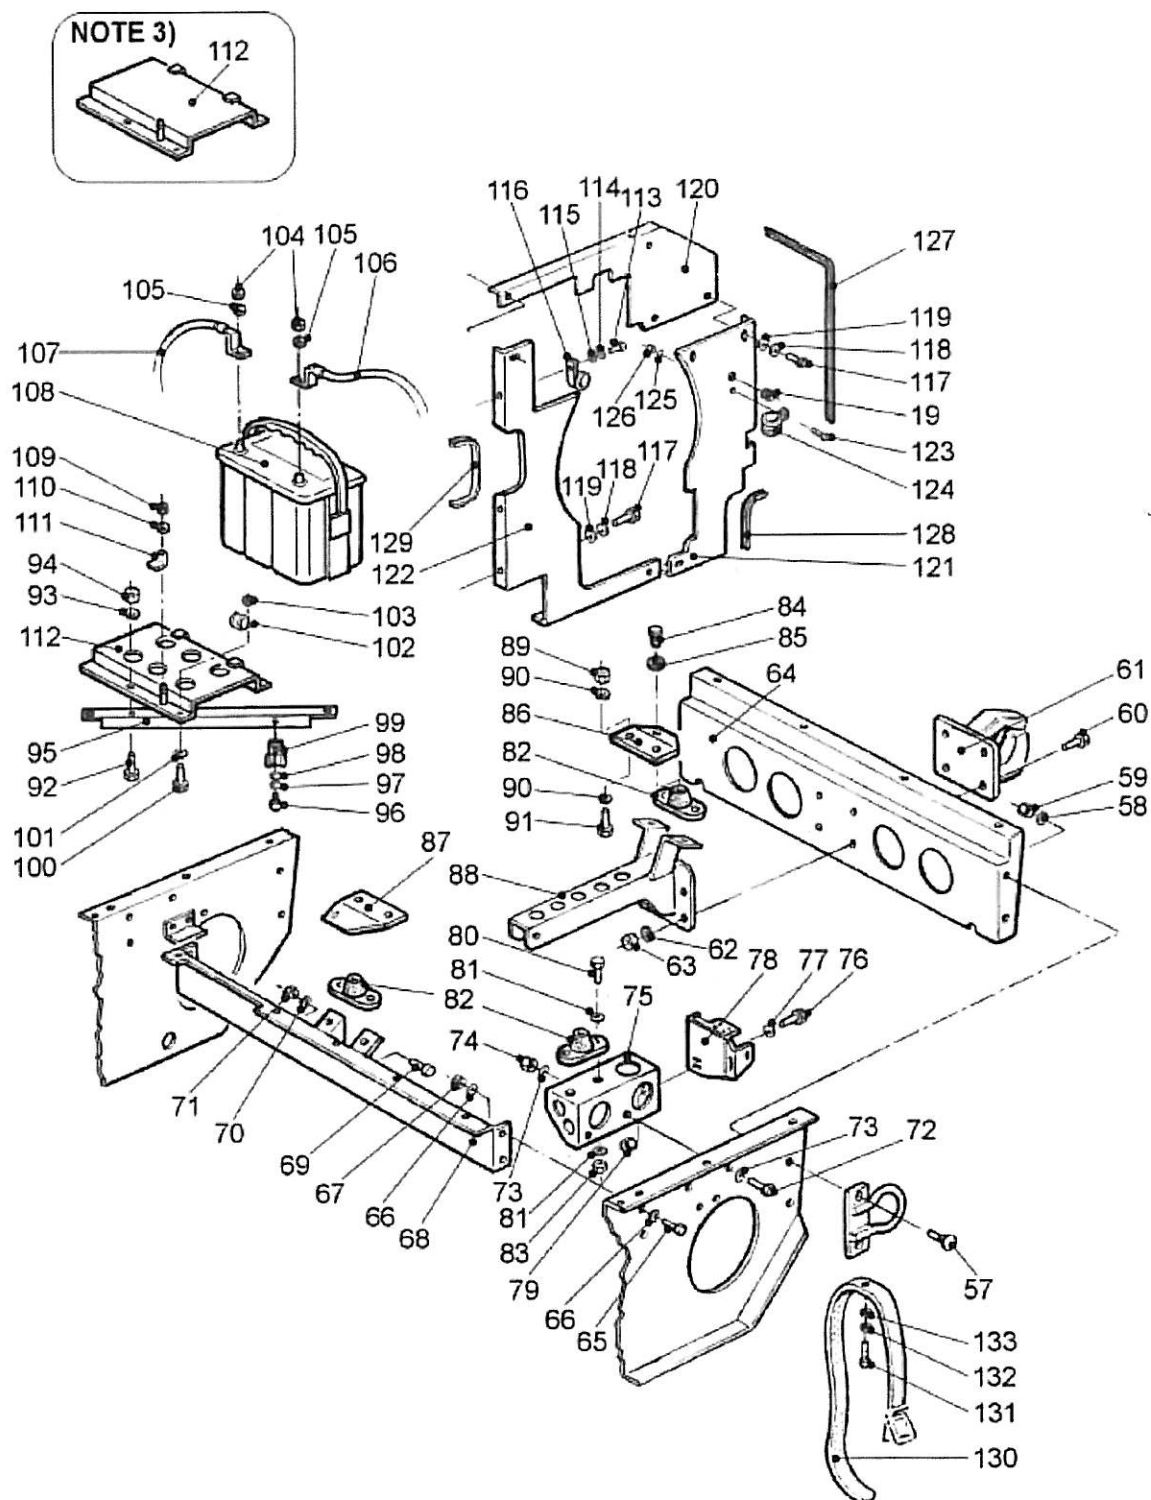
TRAILER AND RUNNING GEAR GROUP (SHEET 2)
